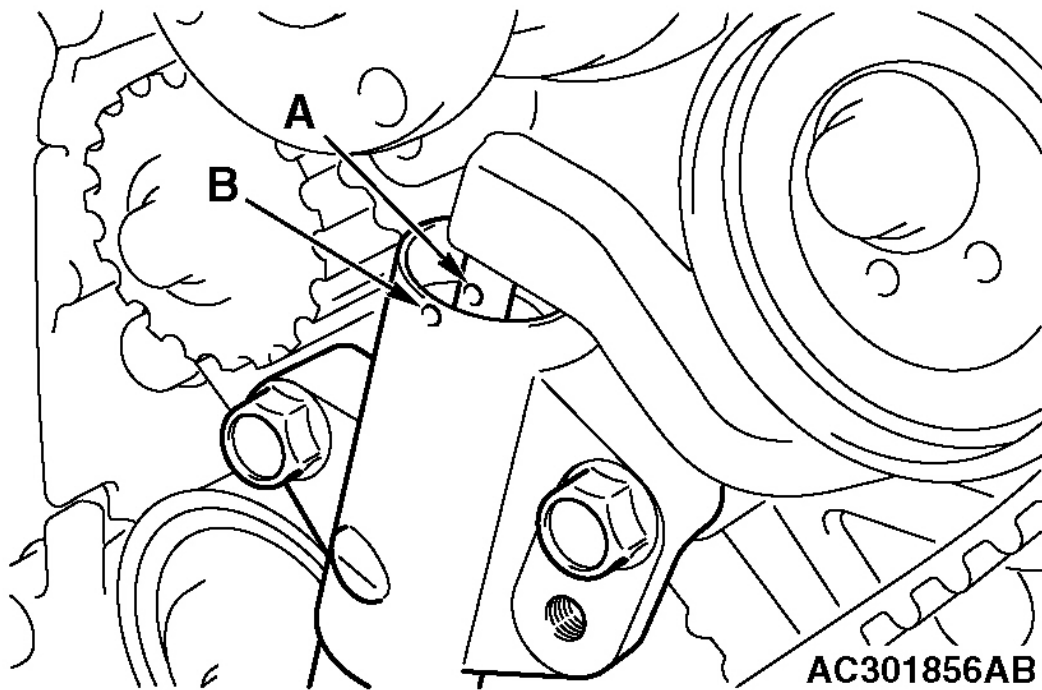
Aligning Timing Belt Tensioner Adjuster Rod Set Hole
